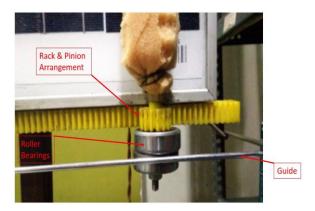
Setup showing rack and pinion arrangement, roller bearing and guide
